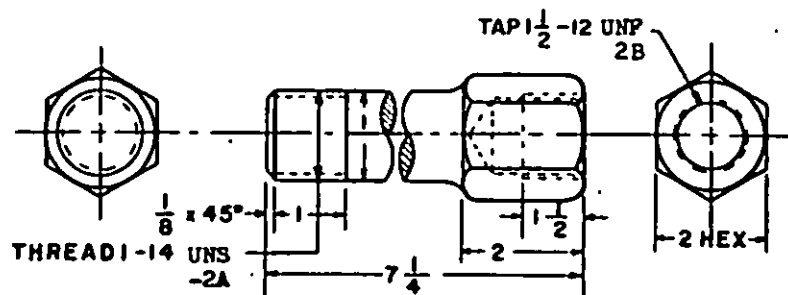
Type VIII, class 1, style C wailer adapter, mechanical, gear and bearing, male and female thread with 1-1/2-12 UNF-2B tapped hole.
